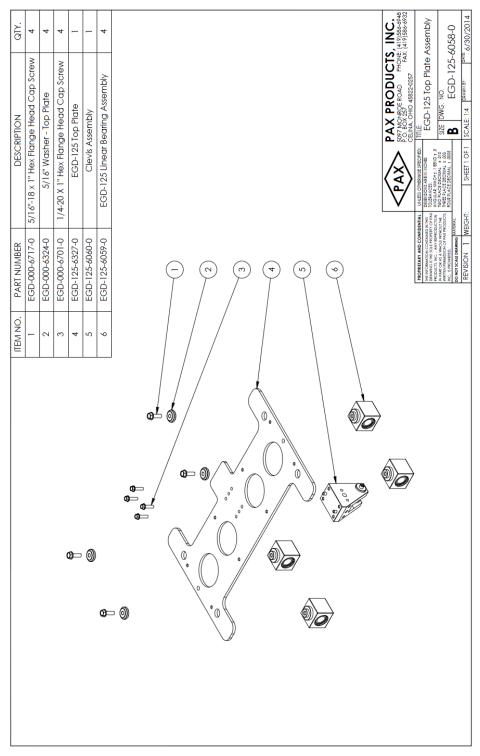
EGD-125 TOP PLATE ASSEMBLY
